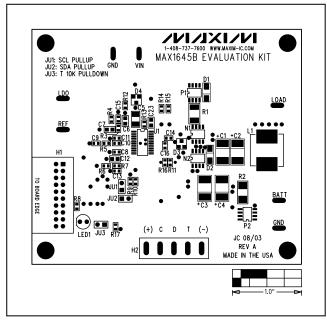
MAX1645B EV Kit Component Placement Guide— Component Side
